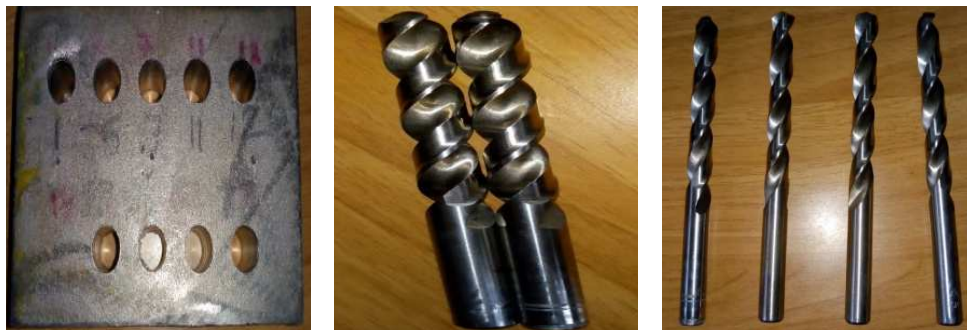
(a): Workpiece for Completed Process Figure 2 (b): HSS Drill Tool Figure 2(c): Tool Wear
